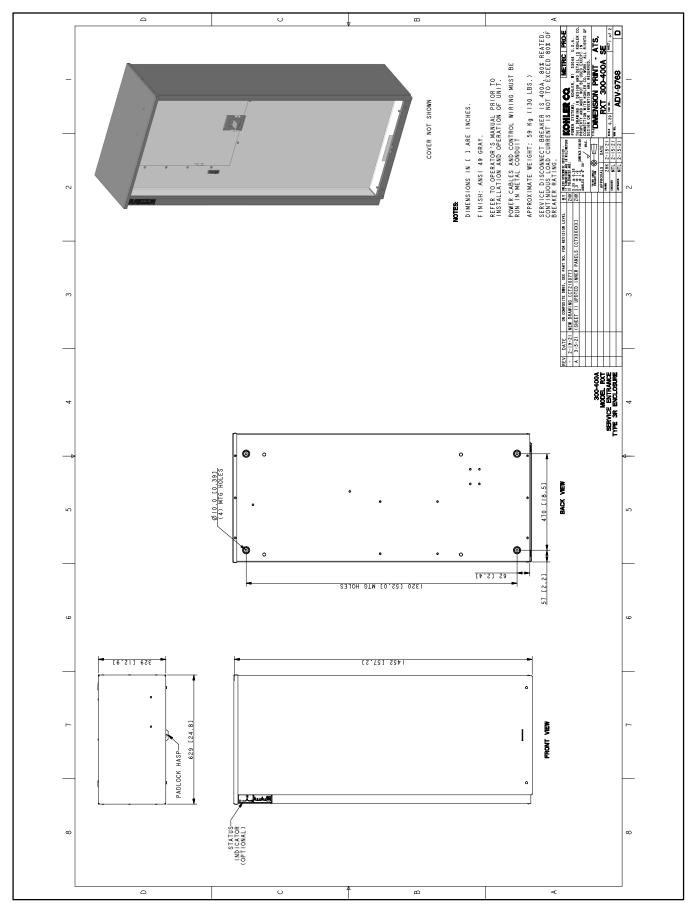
Enclosure Dimensions, 400 Amp Service Entrance, ADV-9768 Sheet 1
